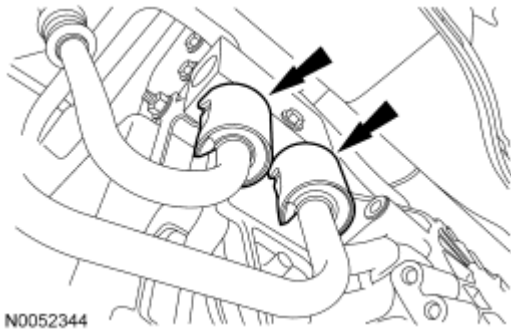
Locating Secondary Latches On Transmission Fluid Cooler Tubes
